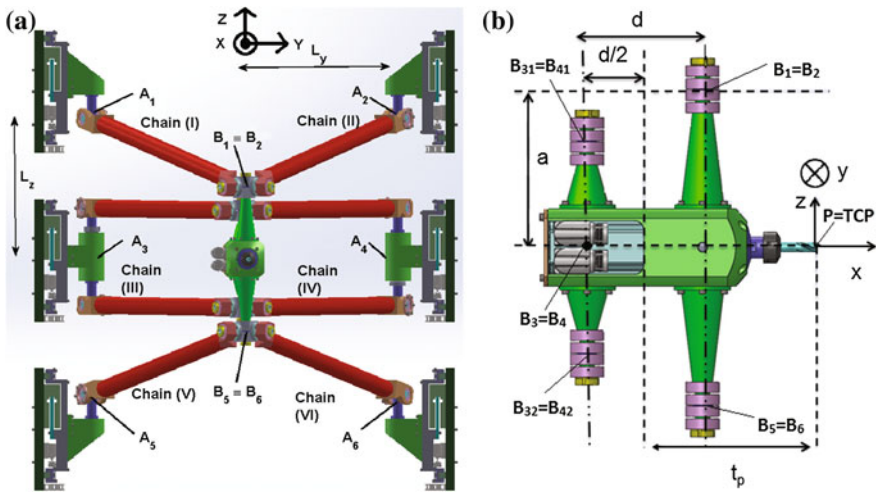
The main geometric parameters of the robot and the points labelling. a Robot front view. b Moving platform side view
